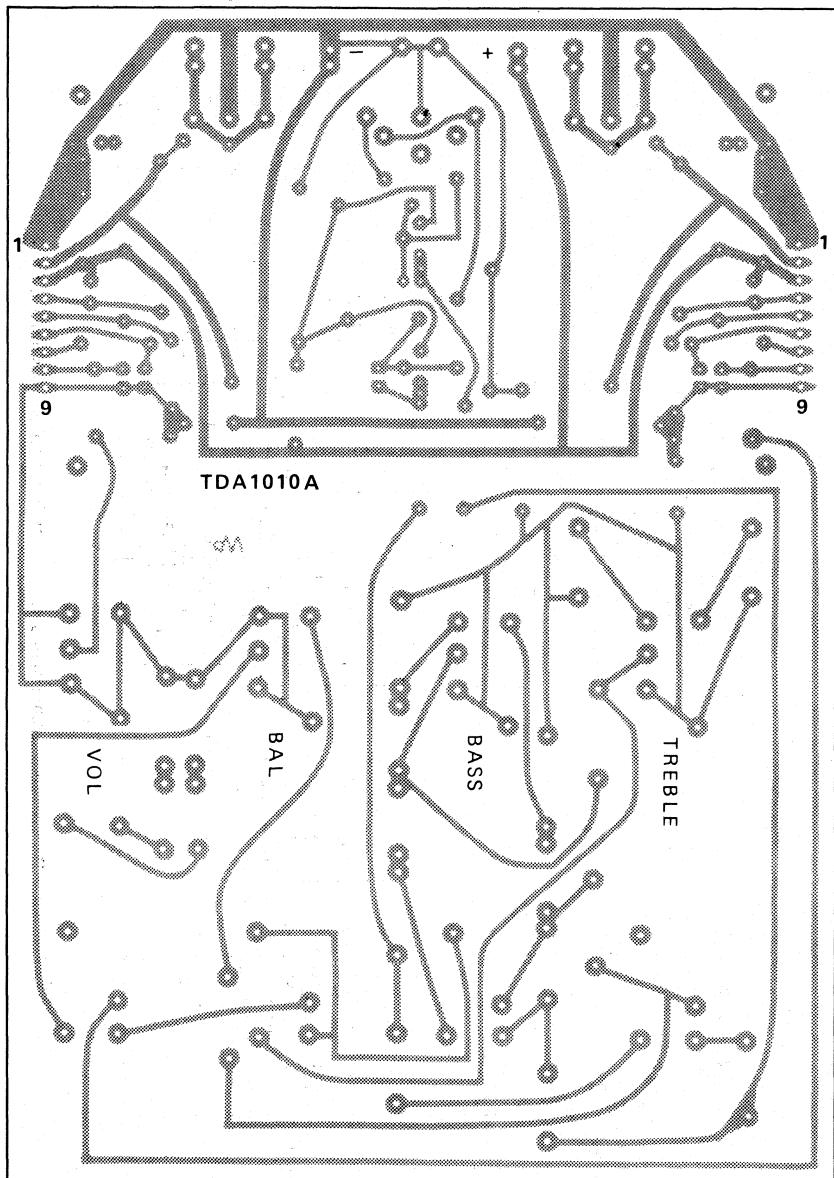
Track side of printed-circuit board used for the circuit of Fig. 17 (Fig. 16 partly); p.c. board dimensions 169 mm x 118 mm.
